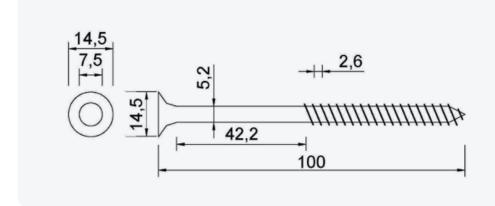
Dimensions of the Type 17 screws used for manufacture.
